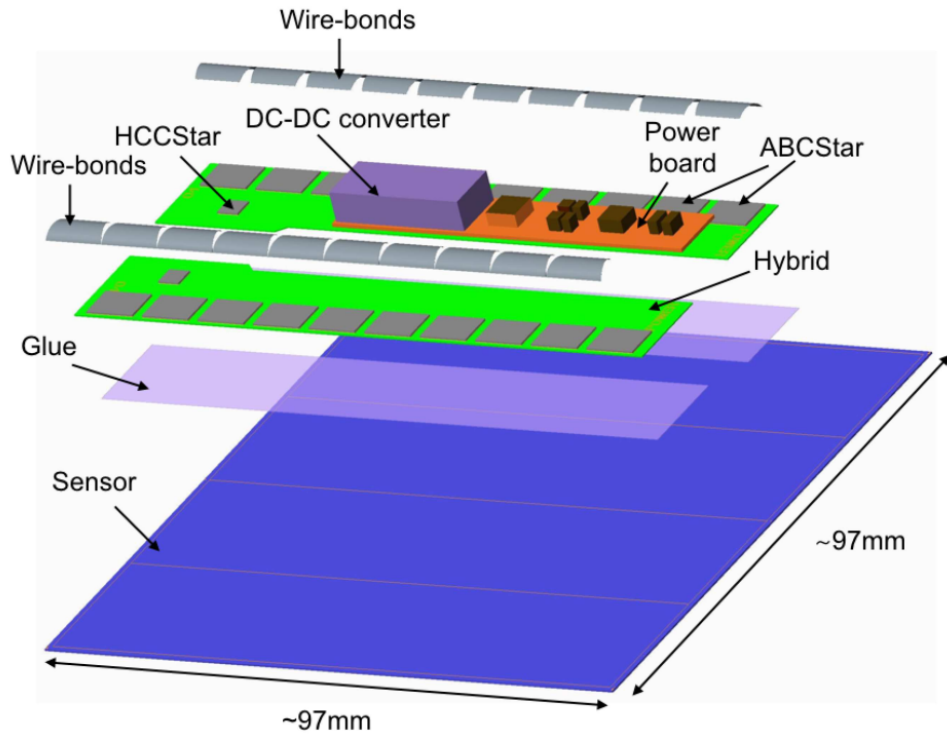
The ATLAS ITk SS module gluing of assembly step [31].
